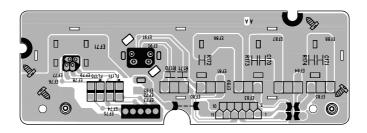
EU55 Front Jack PC Broad (Bottom side)
